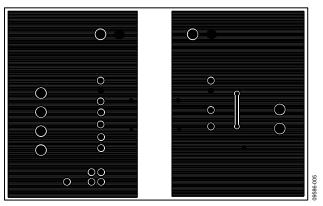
EVAL-ADM2483EBZ Evaluation Board Solder Side
